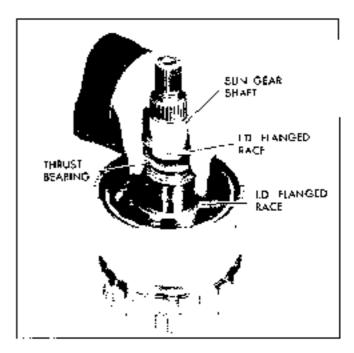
E-132 Installing Center Support to Sen Gear Throst Bearing and Races
